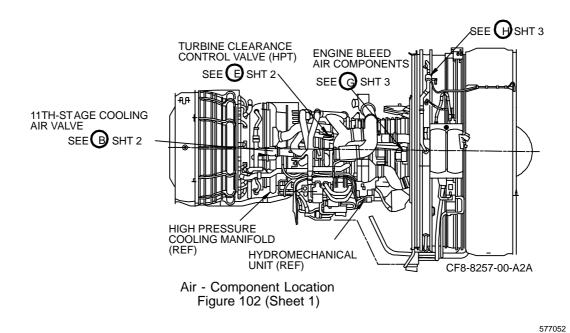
75-00 Air Component Location Fig. 102 (Sheet 1)
